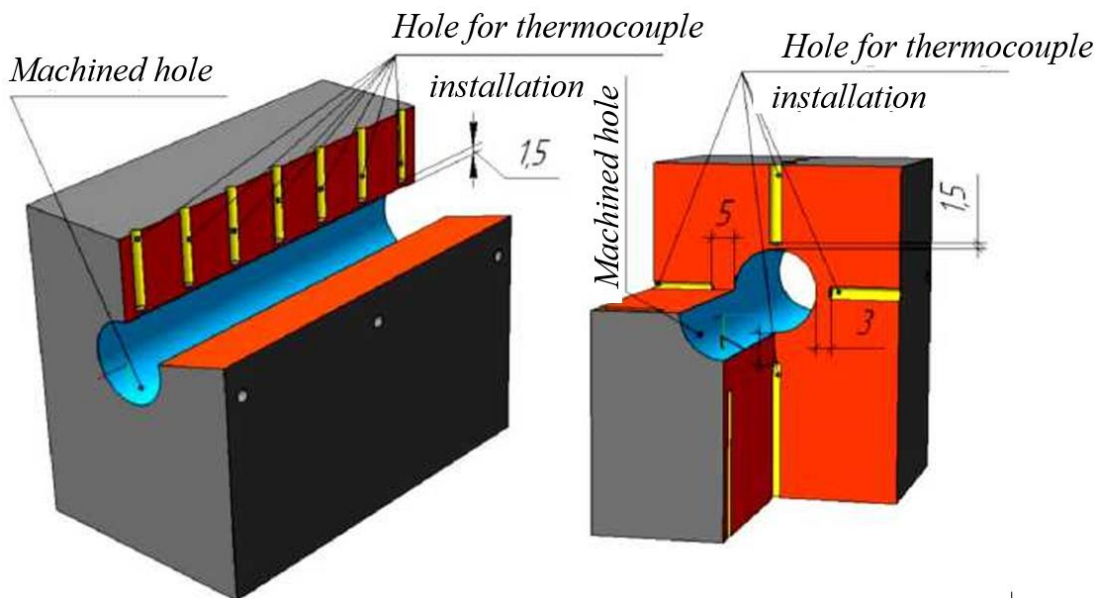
Layout of channels for installing thermocouples in the workpiece
